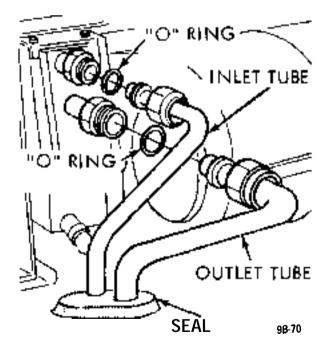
B-208 Inlet and Outlet Pipes and O-Rings
